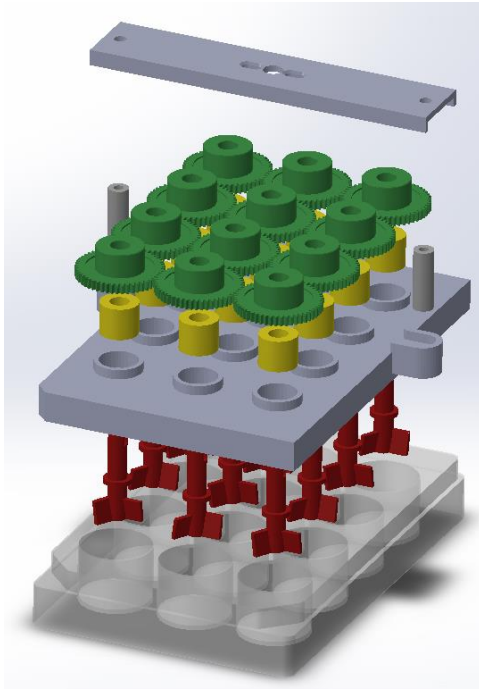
Exploded view of the spinning bioreactor design where the 3D printed cover and mixers fit over and into a standard 12 well plate.
